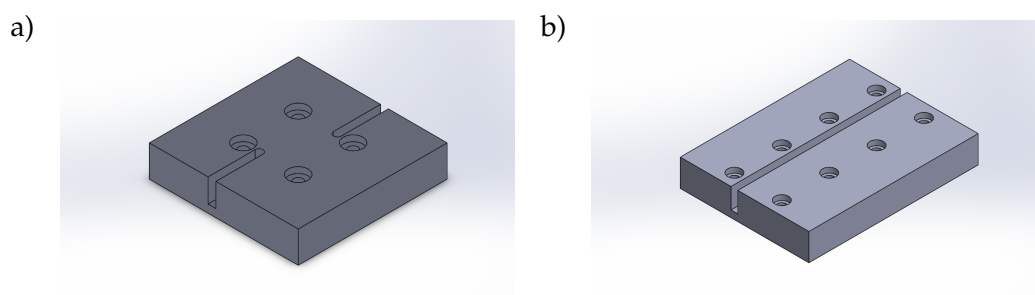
Acetal Co-polymer workpieces in CAD a) Square plate b) Rectangle plate
